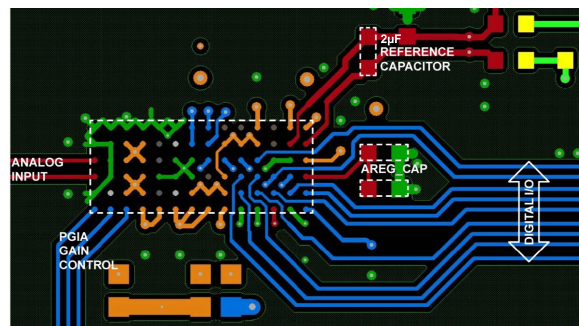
Example Layout of ADAQ7768-1 (Top Layer)
